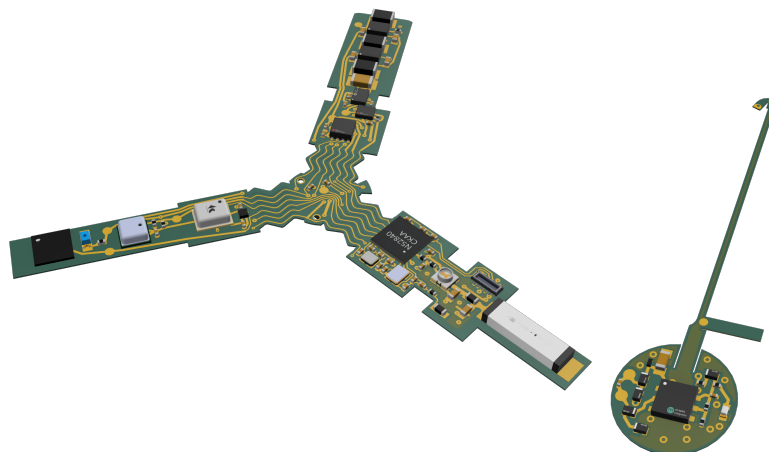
Illustration of the foldable PCB on the left with on the right the leg battery PCB. Designed by D. Werder.
